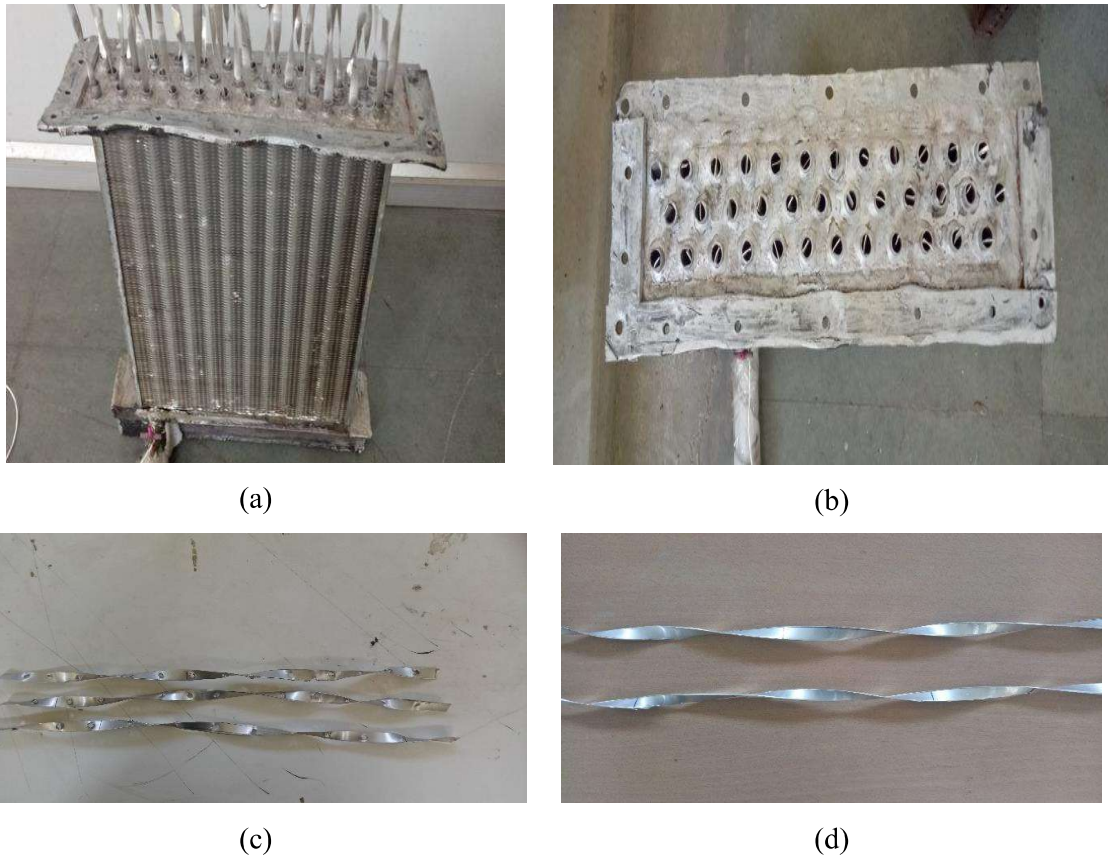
Modified inserts to the radiator, (a) tube inserts in heat exchanger; (b) top view of inserts in heat exchanger; (c) Perforated tube inserts; (d) Twisted tape inserts.
